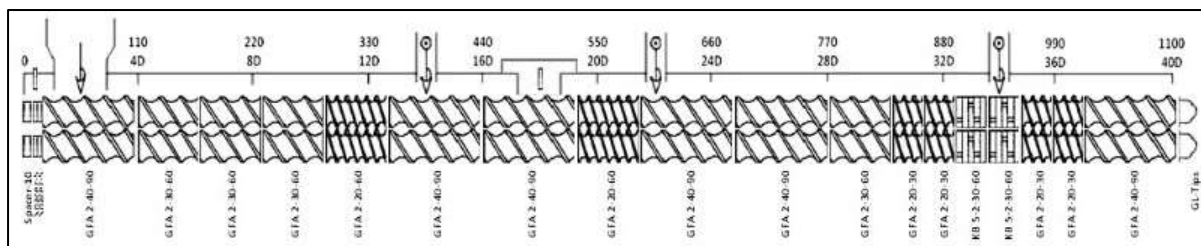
Screw design for 27 mm twin-screw extruder.
